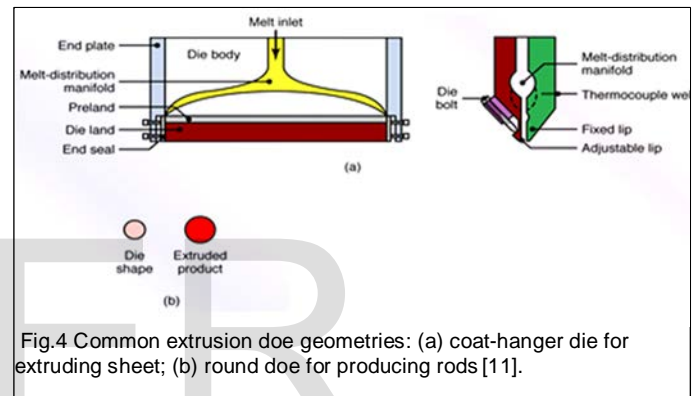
Common extrusion die geometries: (a) coat-hanger die for extruding sheet; (b) round die for producing rods [11].
